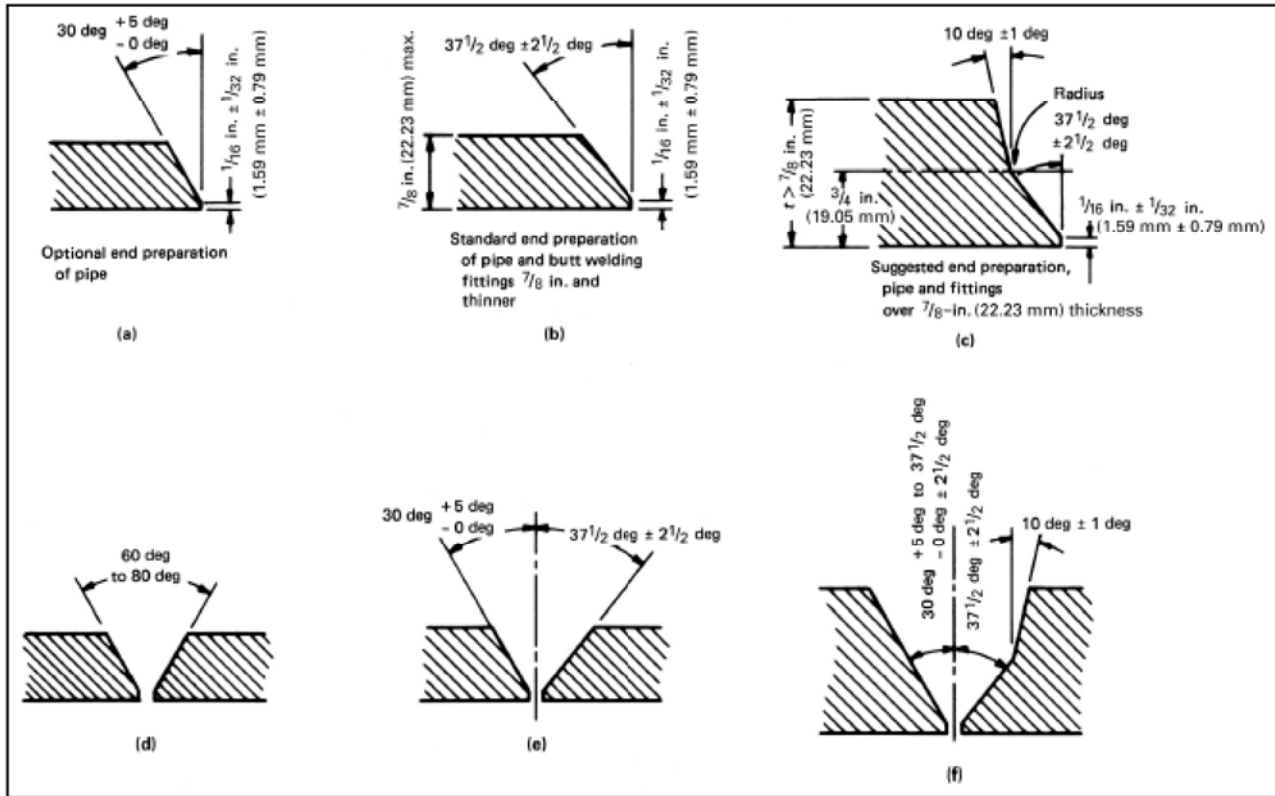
Butt Weld Joint Types for Equal Wall Thickness Components
